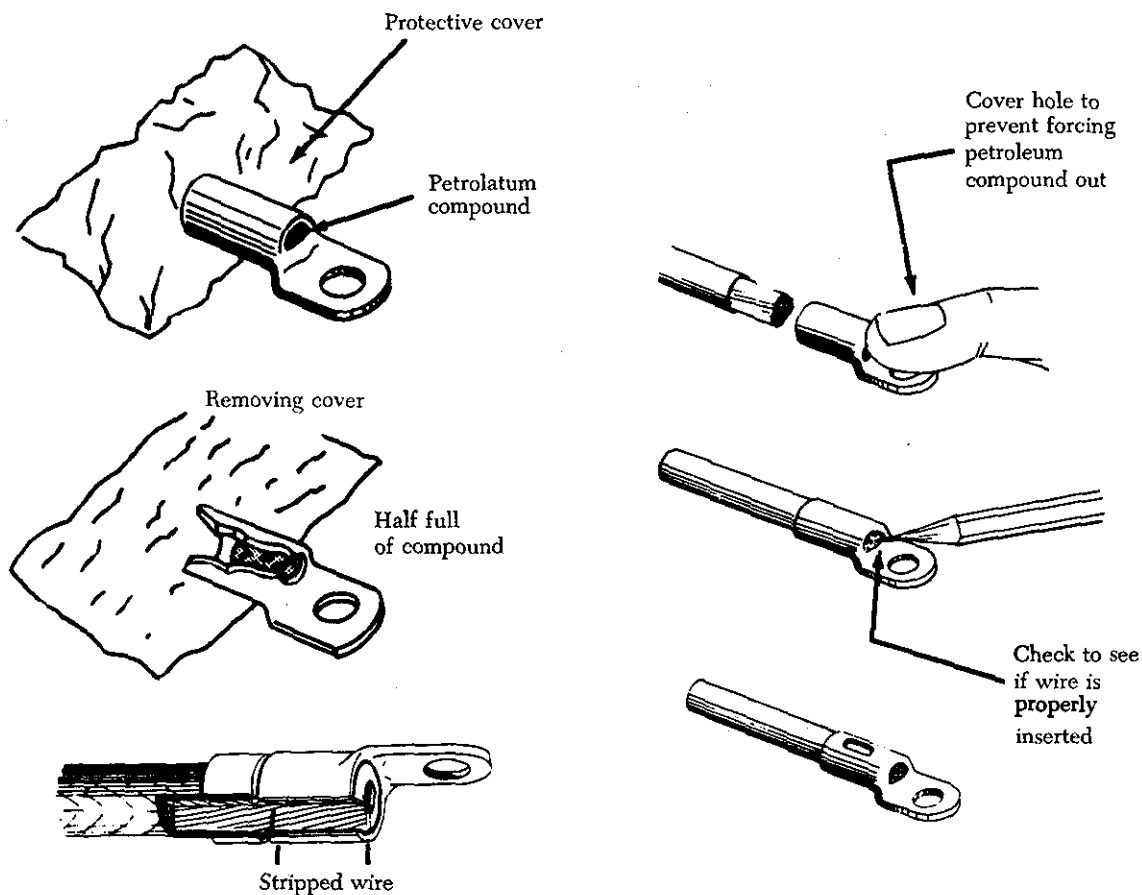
Inserting aluminum wire into aluminum terminal lugs.
